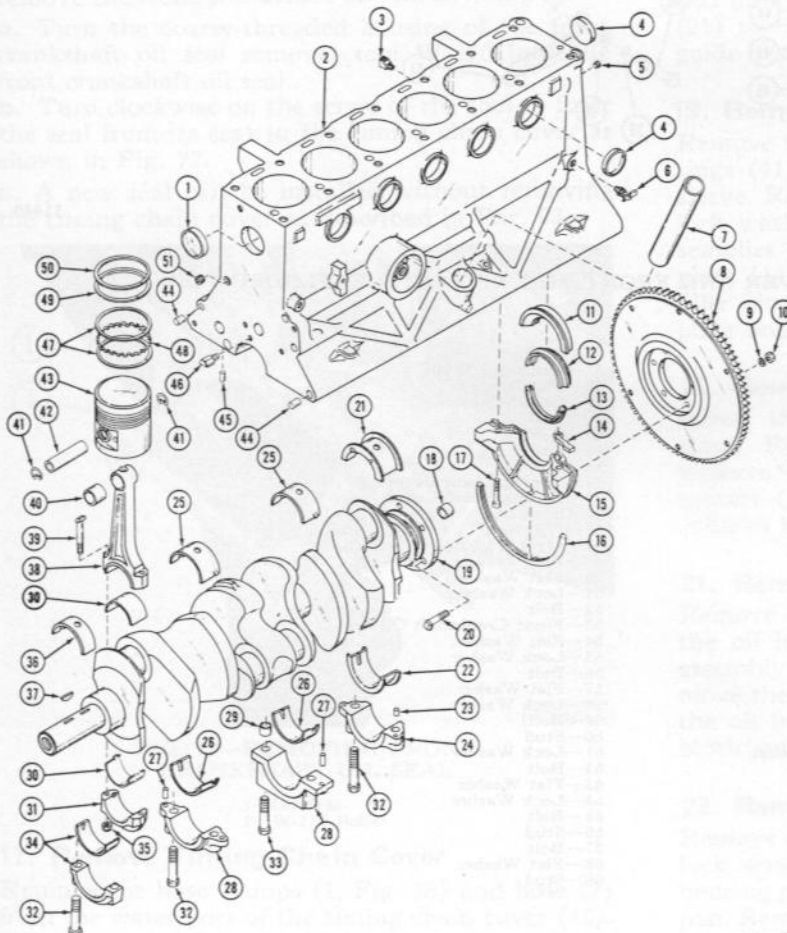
ENGINE CRANKCASE, EXPLODED VIEW
